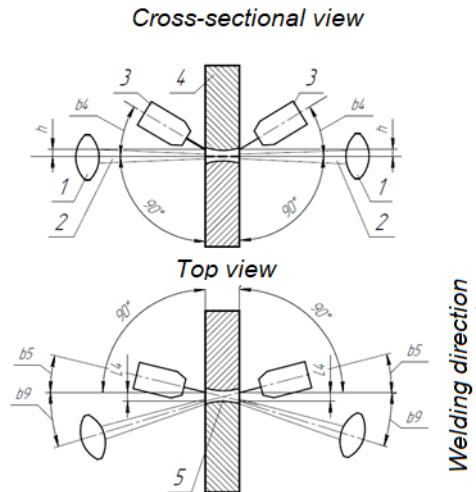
LAHW scheme, "double-sided hybrid" method of butt welds in horizontal position (PC):
